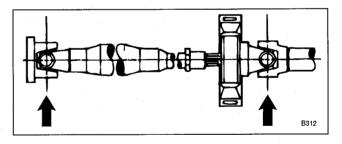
Driveshaft alignment. Centerlines of universal joints (arrows) must be parallel or at 90° to each other.
